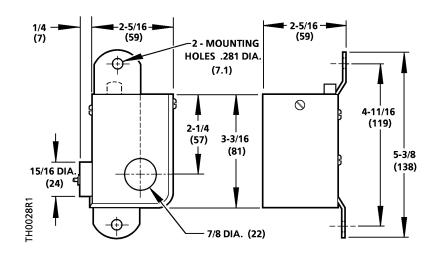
Dimensions of the 134-1510 and 134-1511 Thermostat.
